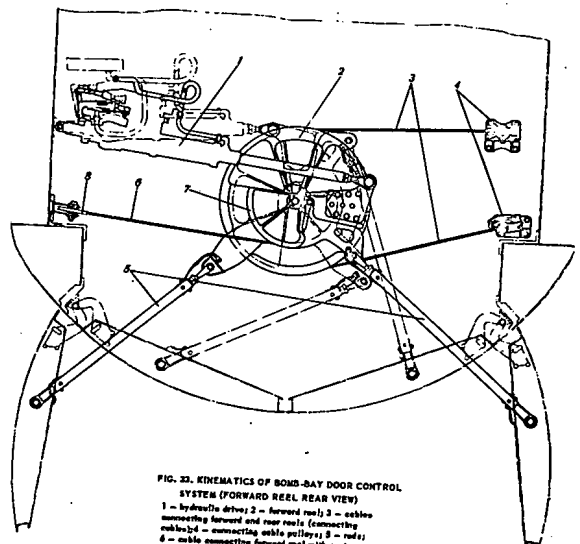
KINEMATICS OF BOMB BAY DOOR CONTROL SYSTEM (FORWARD REEL REAR VIEW)
